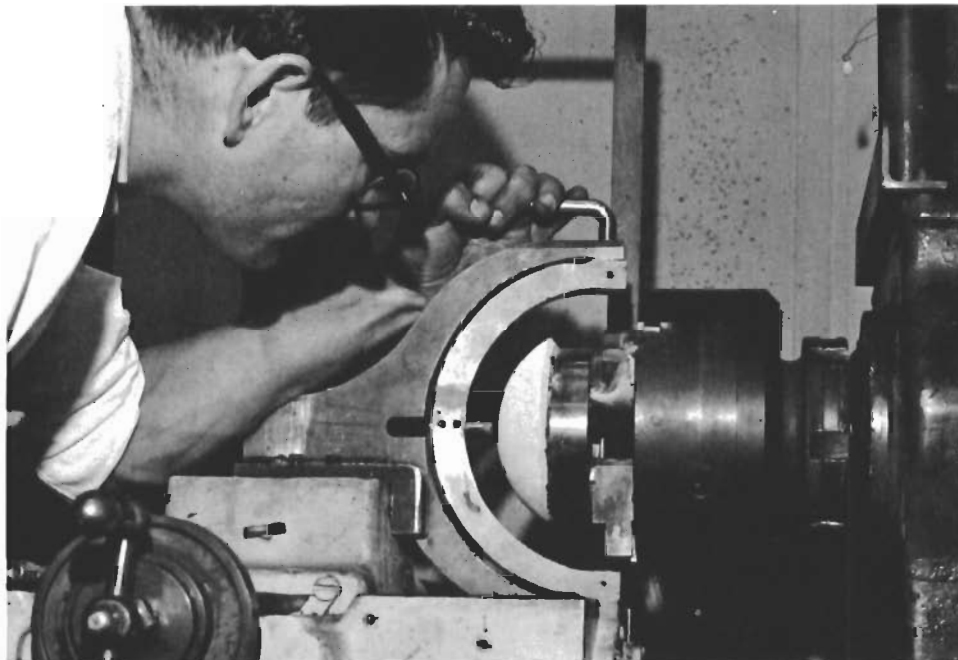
MACHINING COATING TO THICKNESS AND SHAPE; Machining Performed After 600 F Cure
